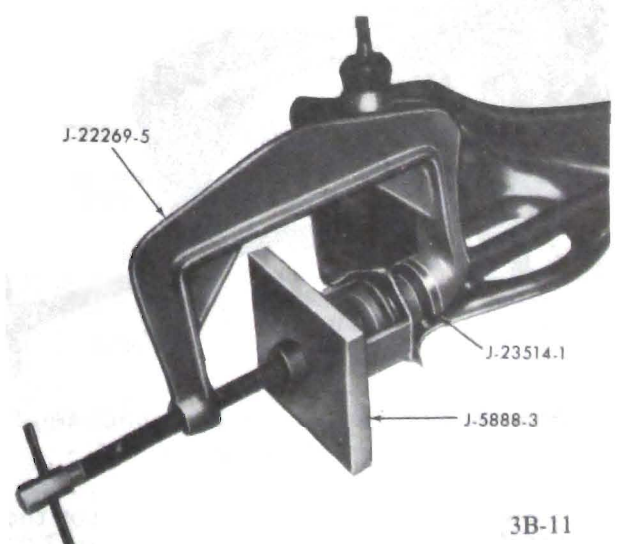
B-11 Removing First Upper Control Arm Bushing Front or Rear
